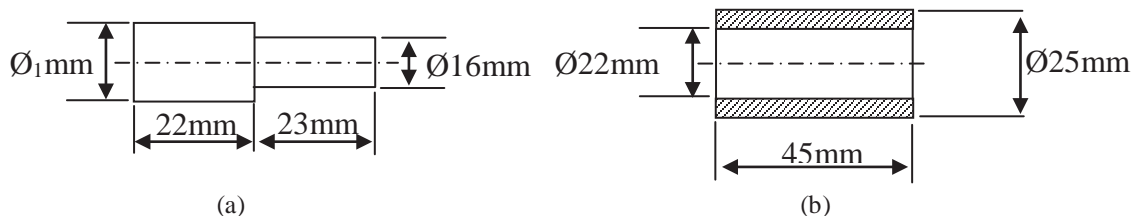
Geometry and dimensions of the welding sample - The value of the diameter Ø_1 depends on the considered gap
